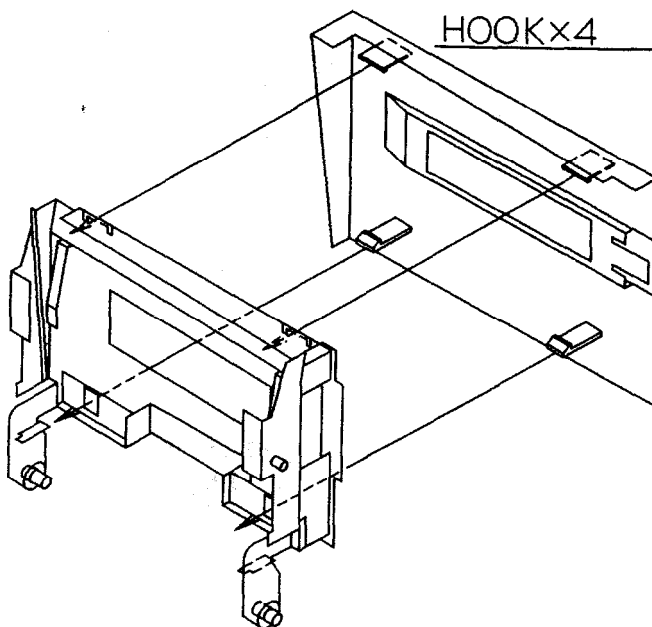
REMOVAL OF CASSETTE HOLDER
